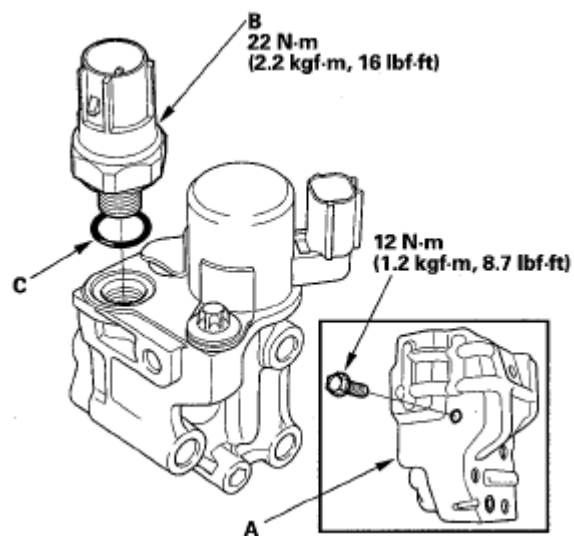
Identifying Rocker Arm Oil Pressure Switch, O-Ring And Cover With Torque Specifications
